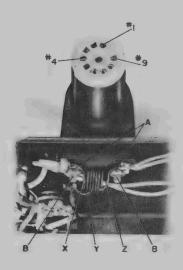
Interior view showing mounting of the swivel-support assembly, pivot blocks, and connections.
